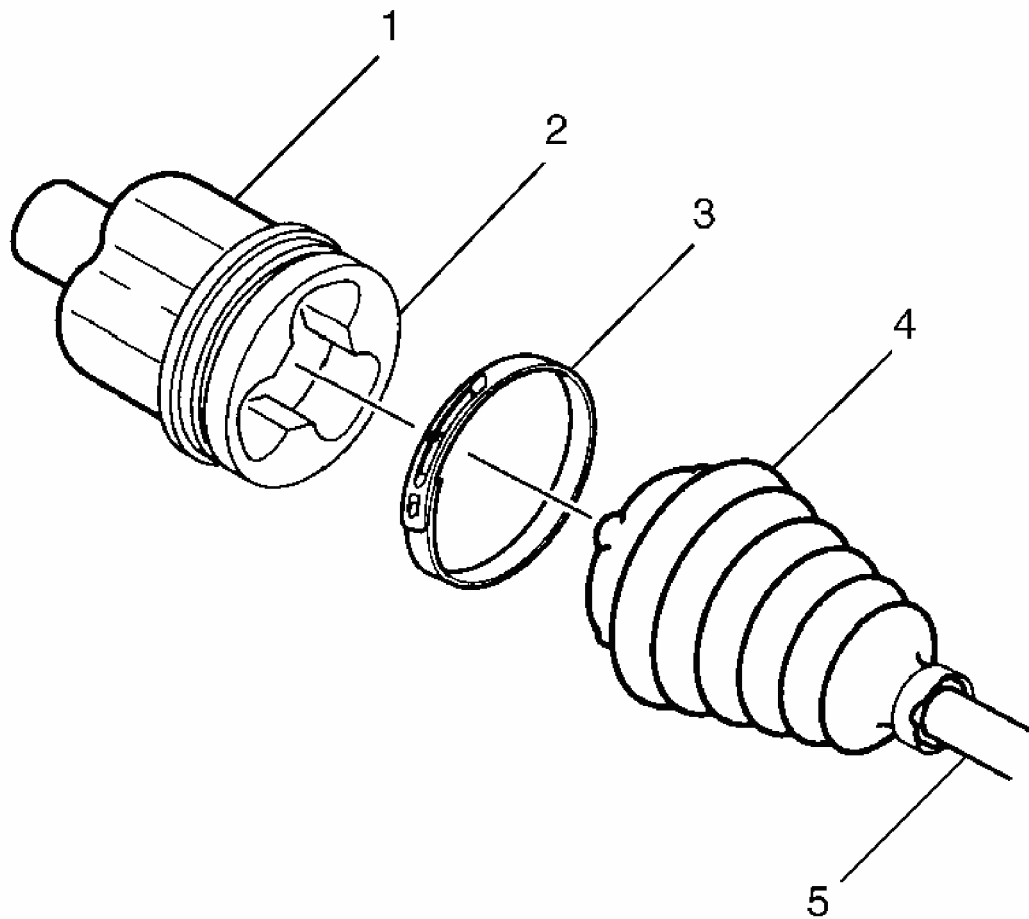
Locating Wheel Drive Shaft Inner Joint & Seal Components
